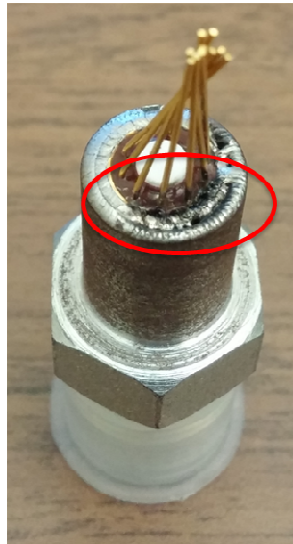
First set of welded samples made of the Polytechnique of Montreal showing the detail of the poor joint between the TO Header and the metal shell.
